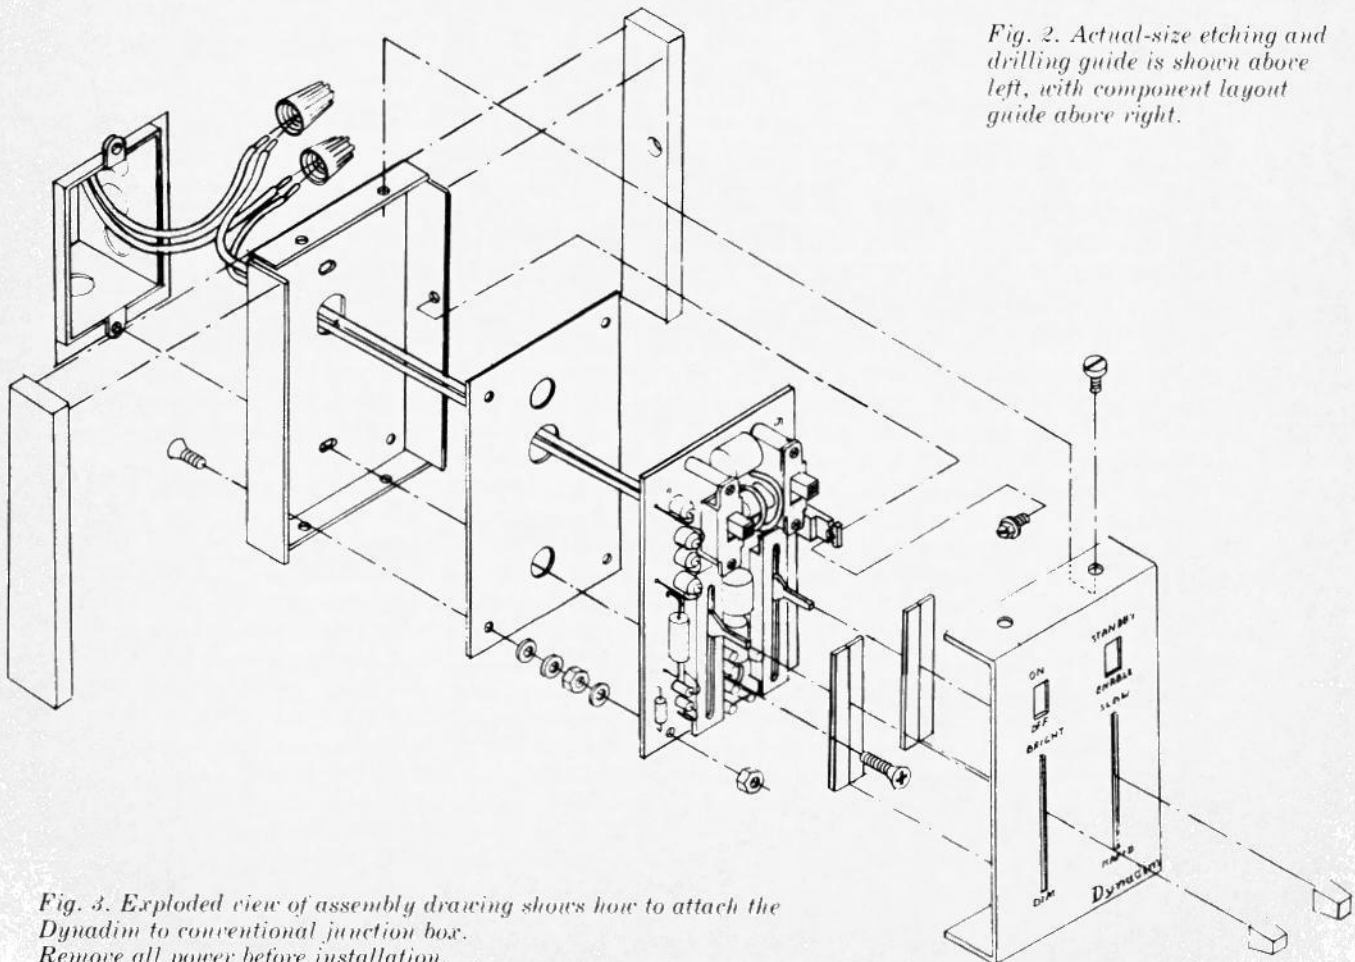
Exploded view of assembly drawing shows how to attach the Dynadim to conventional junction box. Remove all power before installation.
